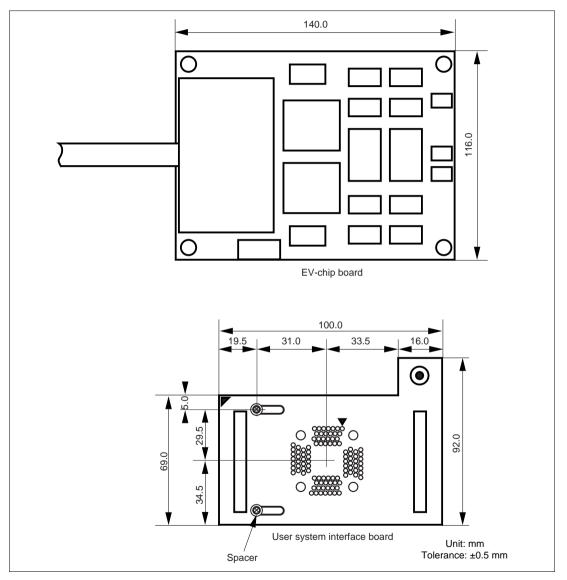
Dimensions for EV-Chip Board and User System Interface Board
